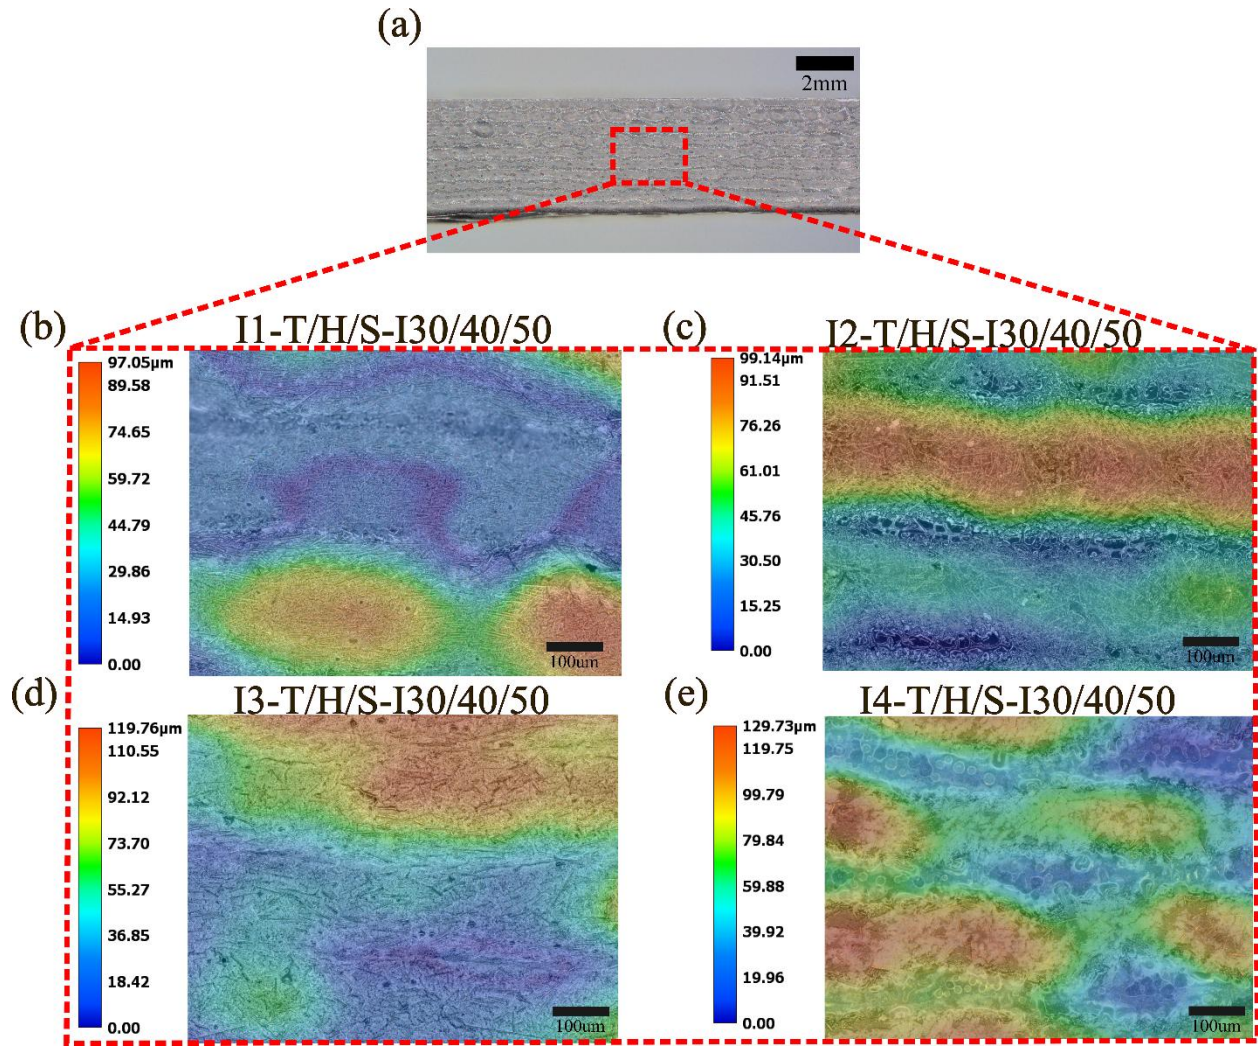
Print quality evaluation of DIW-fabricated honeycomb composites: (a) Optical image of printed skin layers, (b) - (e) surface height contour maps of the DIW printed specimens fabricated using I1-I4.
